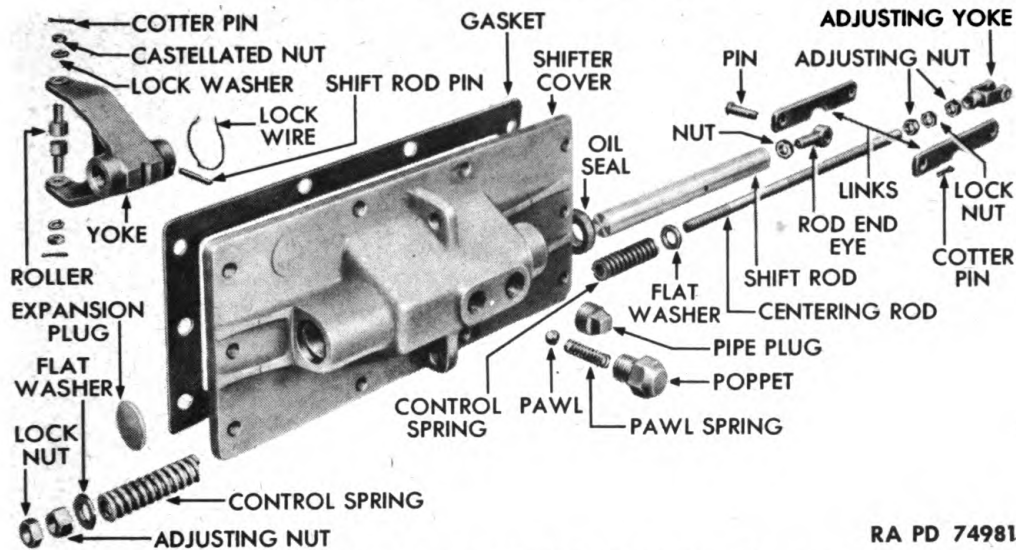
Shifter Cover and Shift Rod — Disassembled
